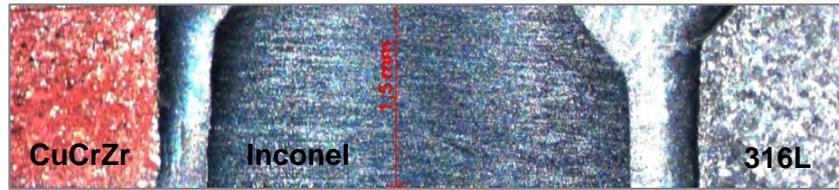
Cross section of electron beam welded CuCrZr/Inconel/316L transition.
